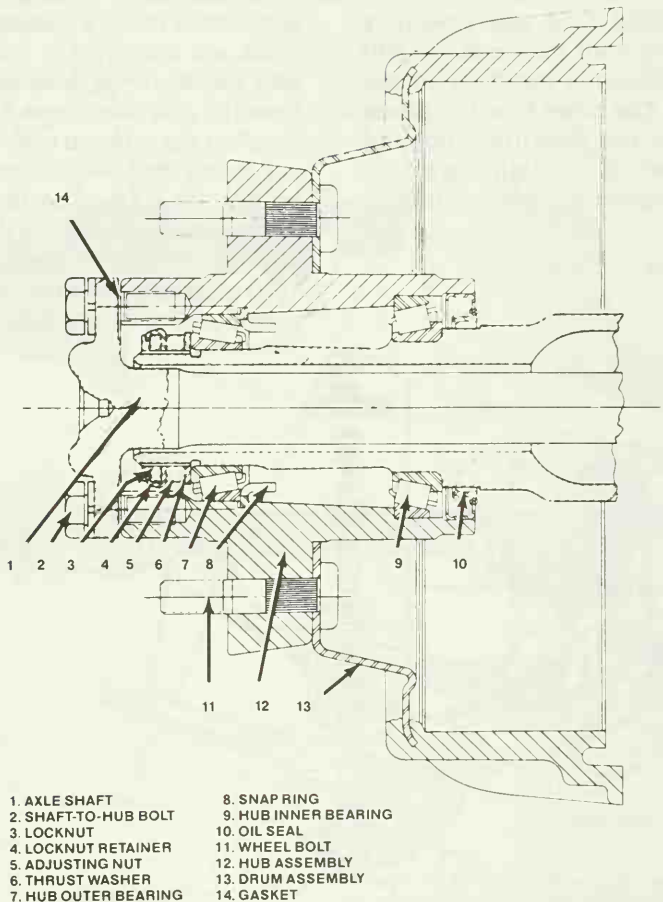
A cross-sectional view of a full-floating style axle assembly. (GMC Truck and Coach Division of General Motors Corporation)
